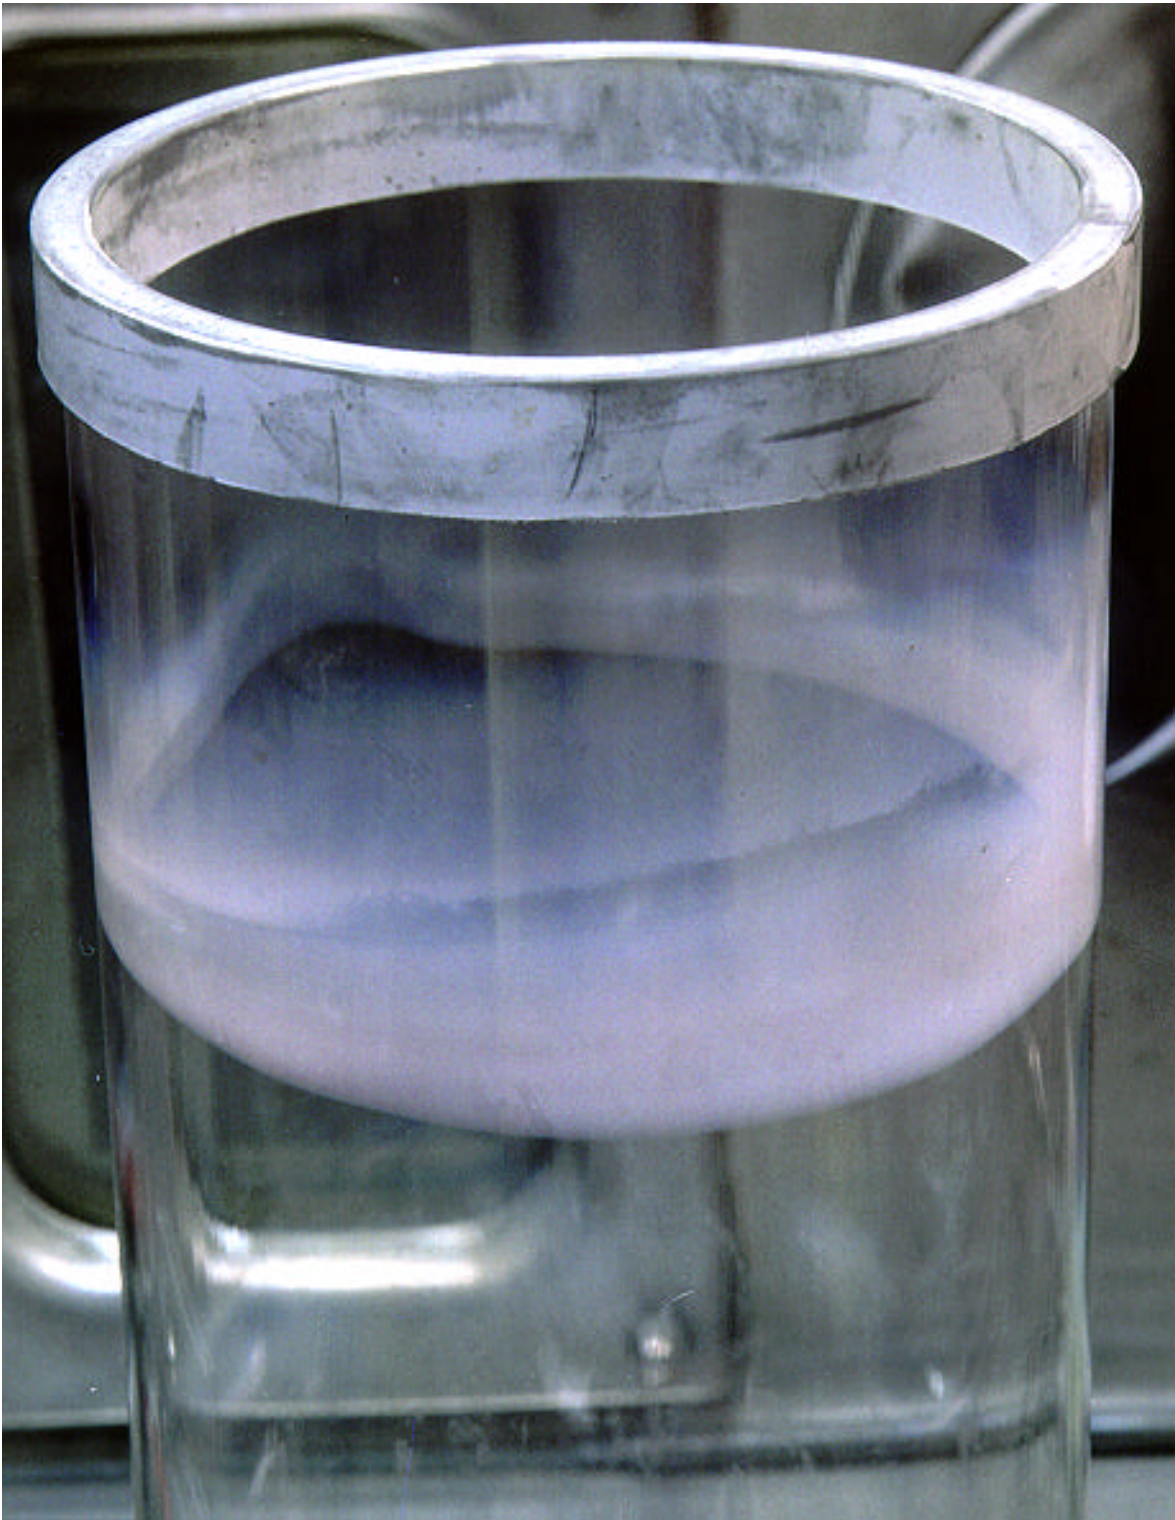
Top-half of Vycor tube used for vacuum containment of standard plutonium casting furnace after a single casting of an above average electrorefined ring into rods.
